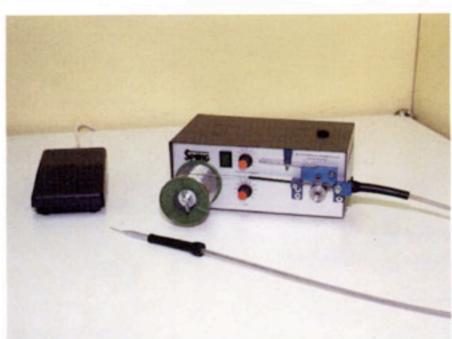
D. The Solder Wire Feeder Model LD-200SS mounts on a remote place. The solder wire feeds through a flexible hose guide to the desired position. The LD-200SS can therefore be easily installed into existing soldering systems. The solder wire feed speed and the feed duration is adjustable. Special documentation on request. See also page 5.
